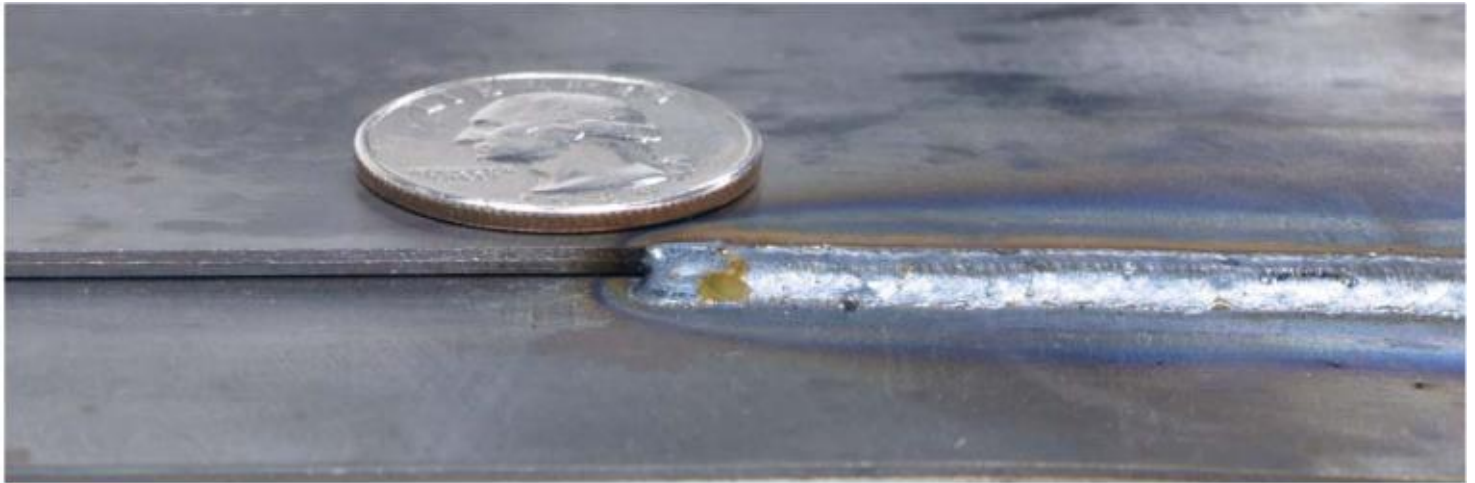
Gas metal arc welding can be used to make high quality welds on sheet steel.
